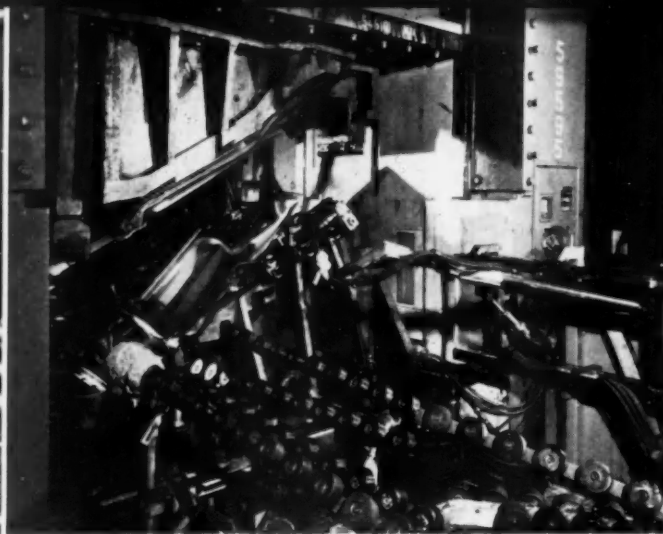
Die ejector mechanism in press No. 7, where the hood side and nose of the fender stamping are flanged
